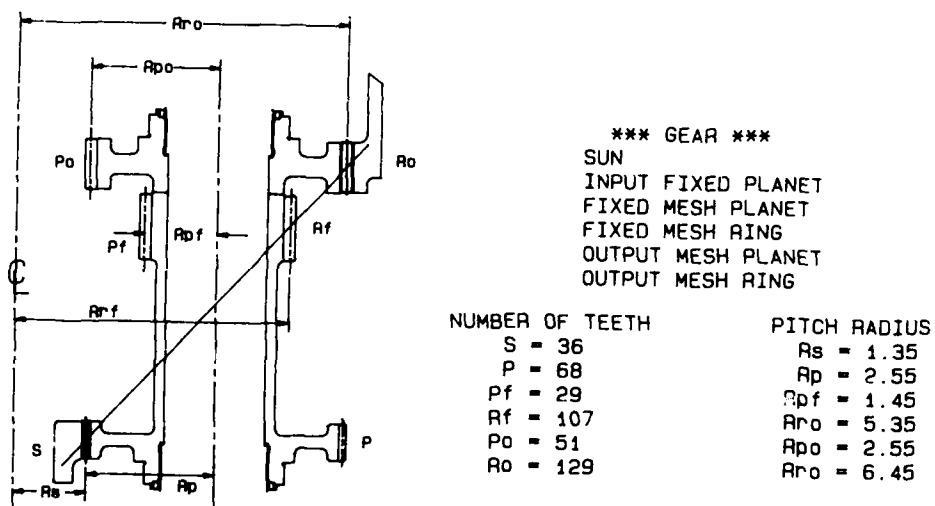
SABP DESIGN RADII AND GEAR TOOTH NUMBERS
